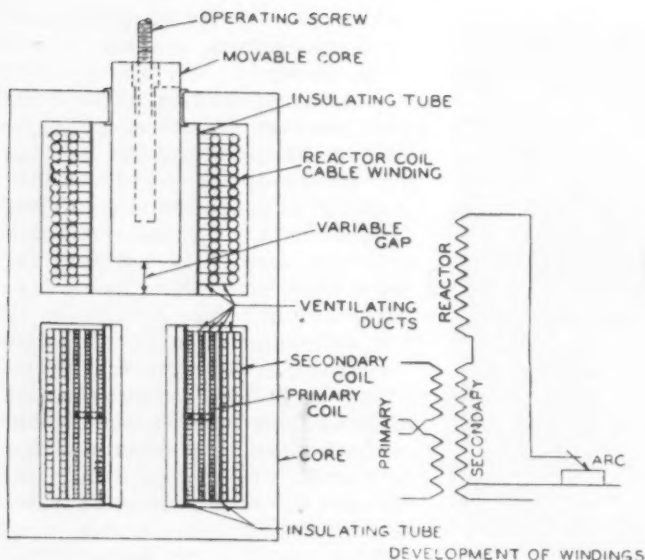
Diagram of an a.c. welding transformer.
